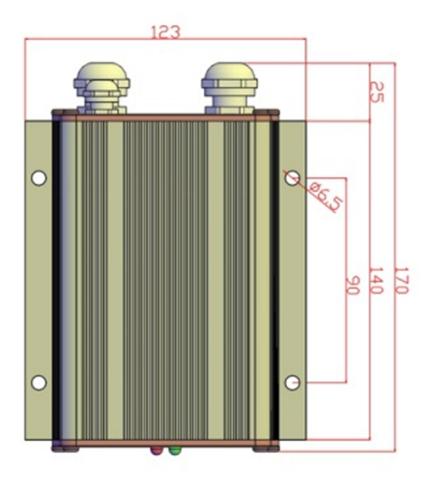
KLS-18S mounting holes' dimensions (dimensions in millimeters)
